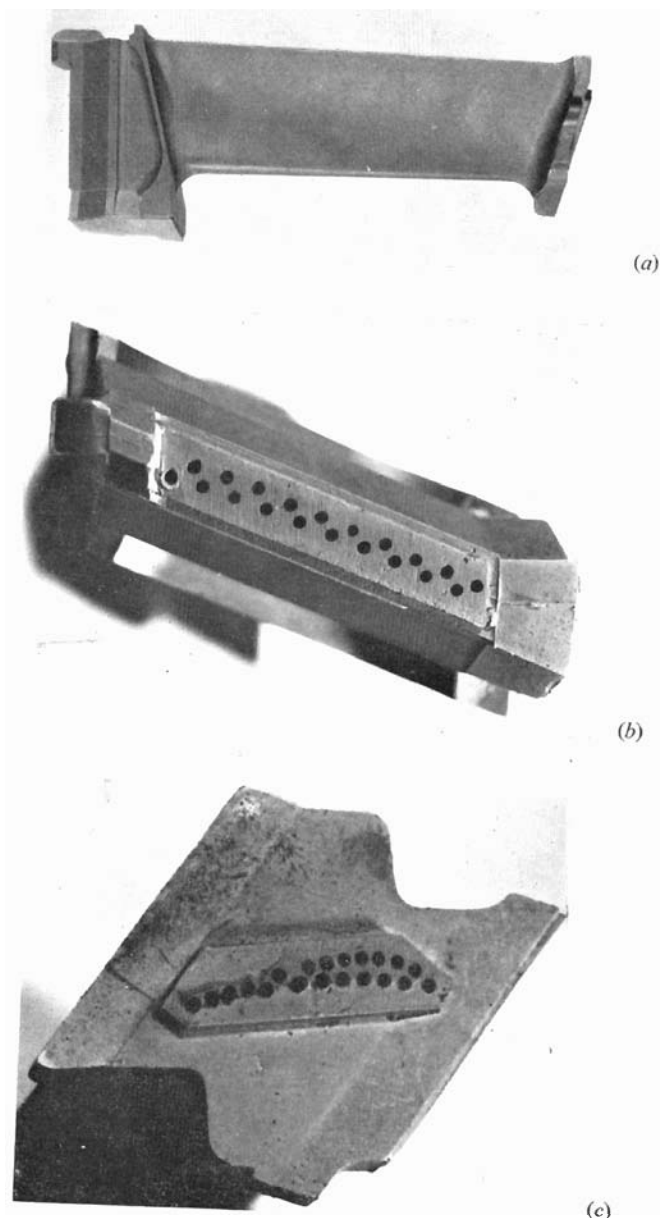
A turbine blade produced by investment casting: (a) finished blade; (b) cooling passage layout at root end; (c) cooling passage layout at tip end.
